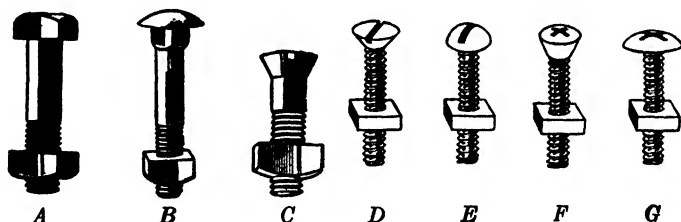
Types of bolts: A, machine; B, carriage, C, plow; D-G, stove.
